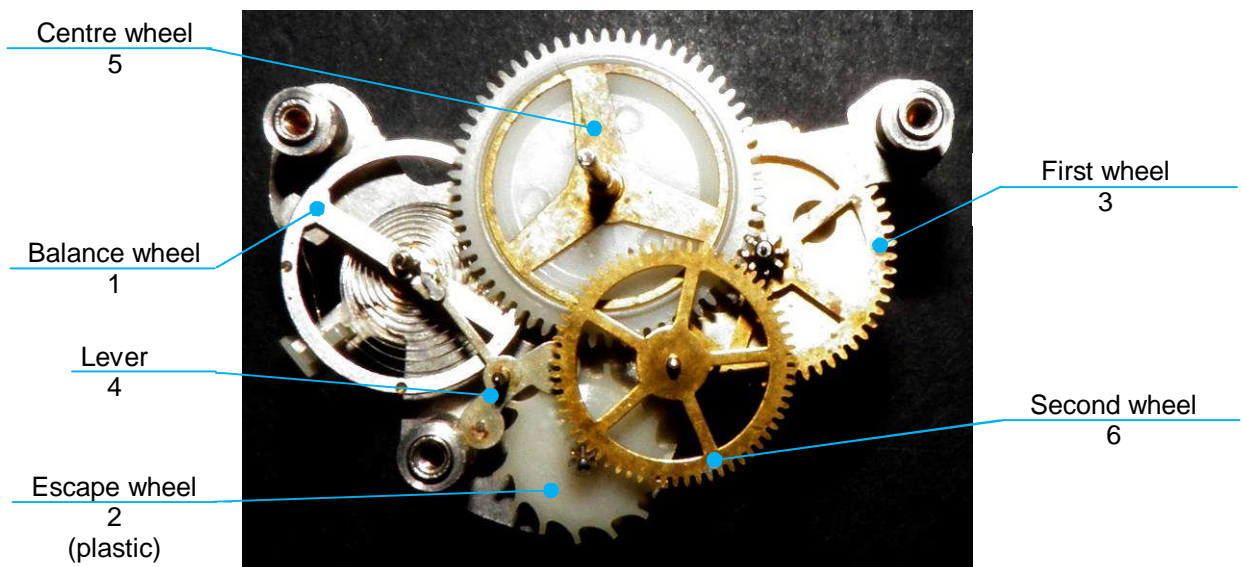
View of clock with front support plate removed. Numbers below each label indicate the order in which these wheels are replaced when reassembling the clock.
